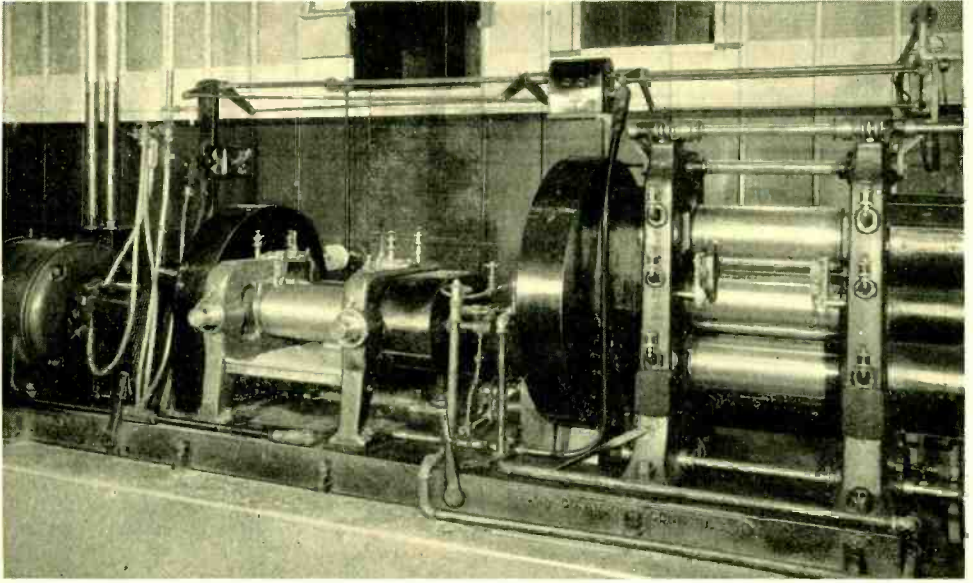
A warming-up mill and calender used for rolling rubber sheet
